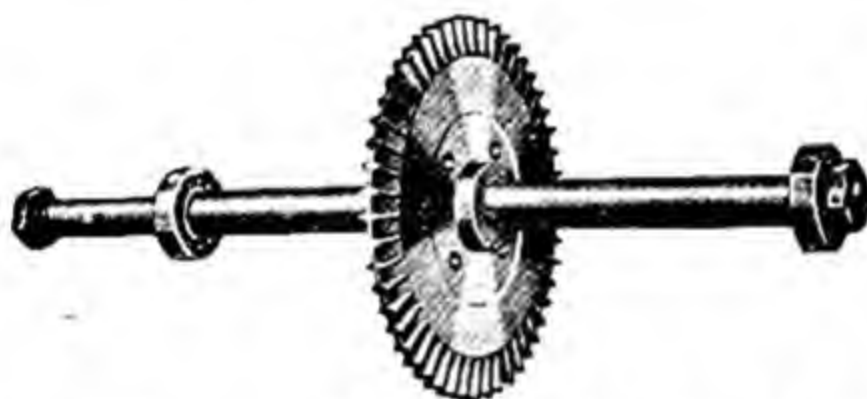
Hydraulic Balanced Multivane Impeller.
